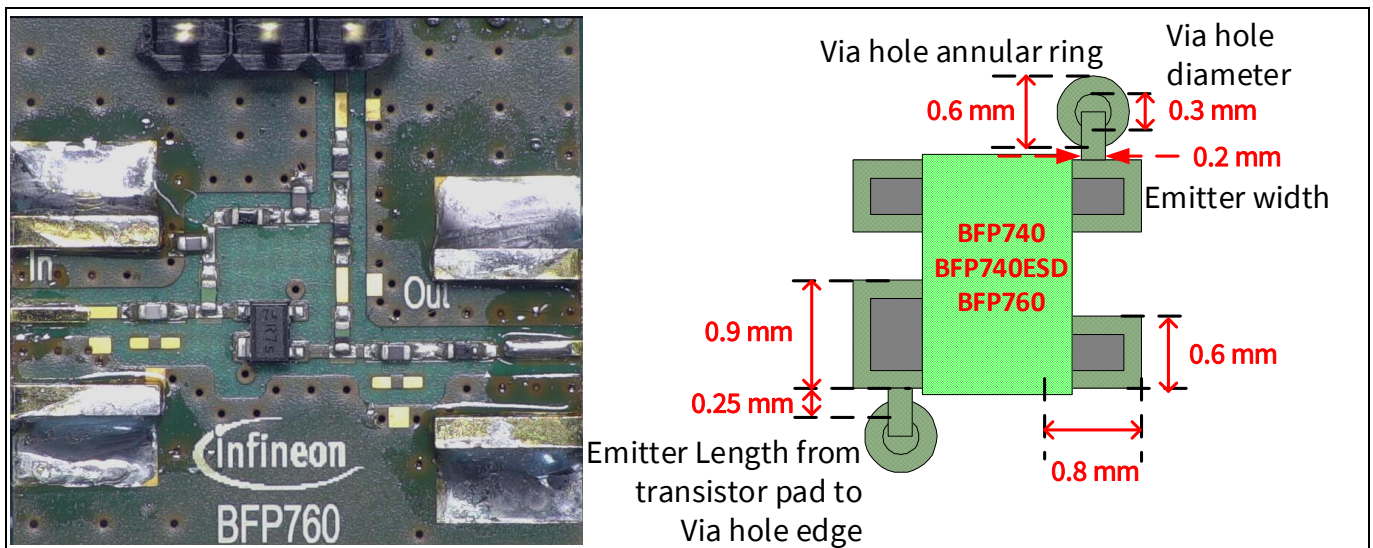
Photo of the evaluation board with PCB marking M130125 (left) and emitter degeneration details (right)
